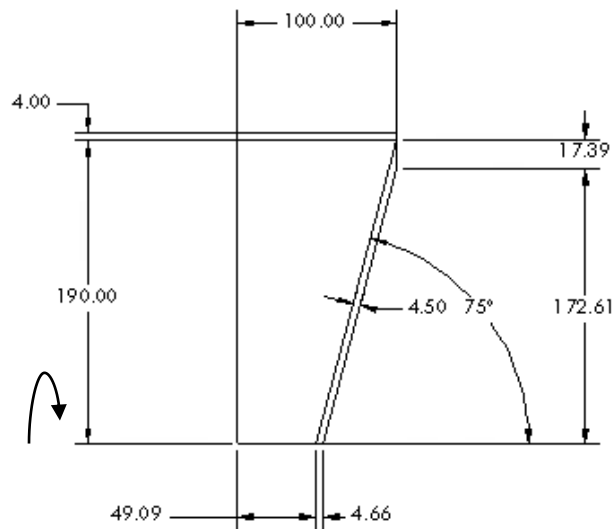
2D Drawing of 15.35 kg TNT Shaped Charge (Dimensions are in mm).
